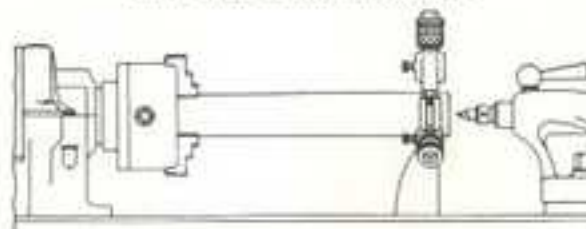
Center Drilling Large Piece with the Aid of a Steady Rest
